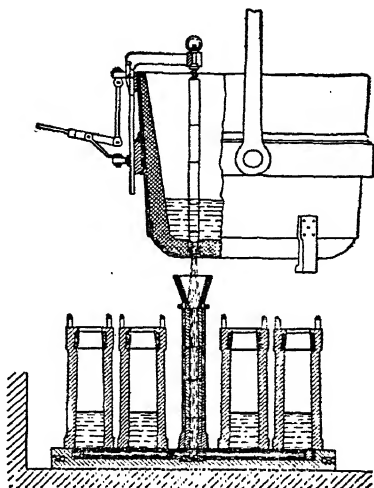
Metal molds for ingots. Bottom pouring. (Moser.)
